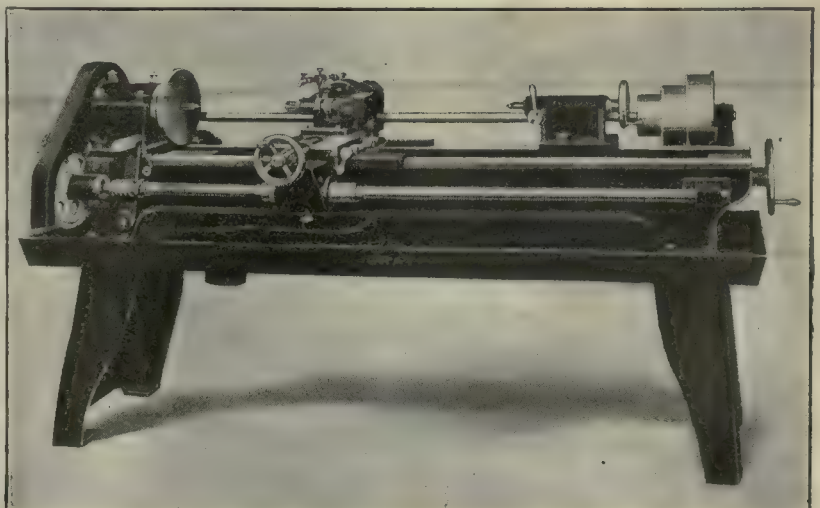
SIZE "A" SWIVEL HEAD WITH LONG BED (EQUIPPED FOR MILLING WORK ON CENTERS)
